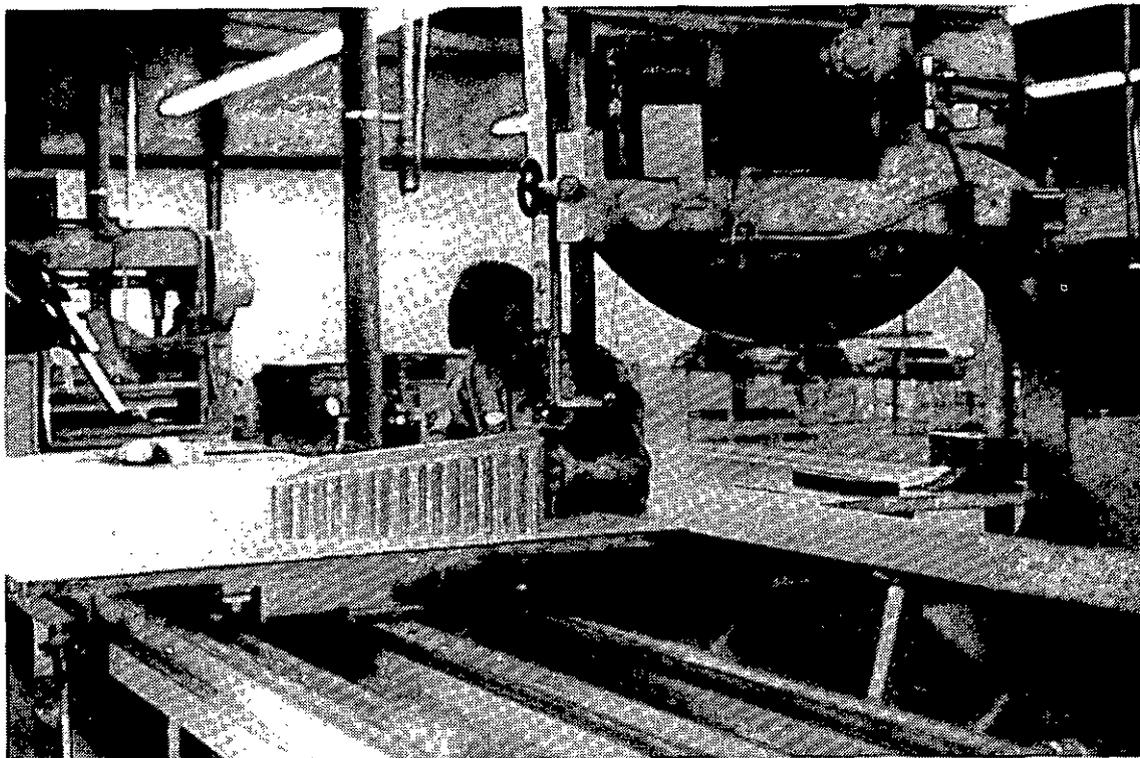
(b) Wedge shaped machined details—expanded and unexpanded slice.
